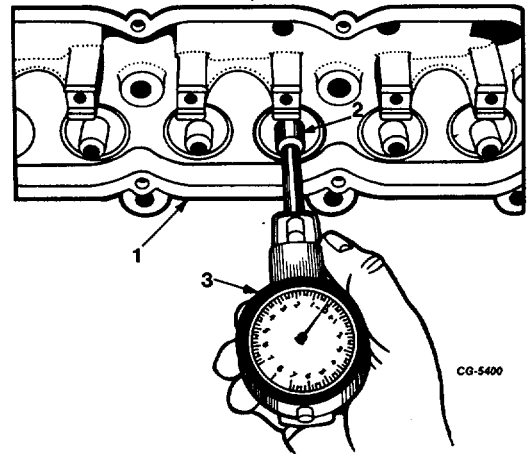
Checking Guide Bore Using Gauge SE-2506
